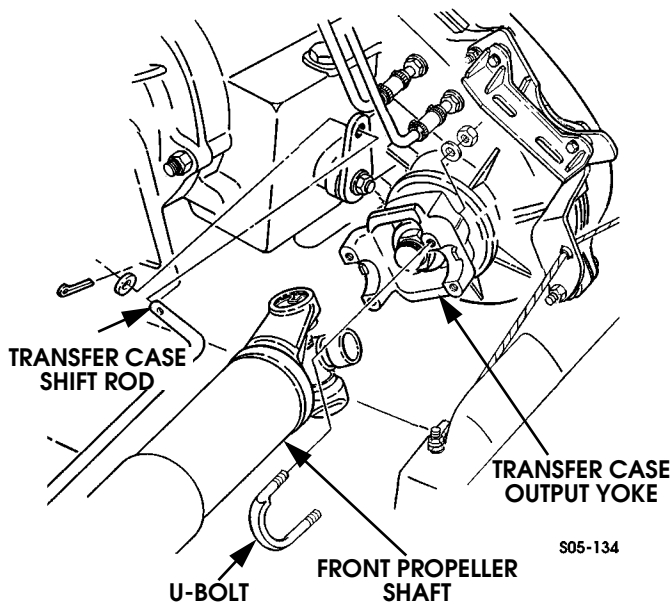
Front Propeller Shaft Attachment at Transfer Case
